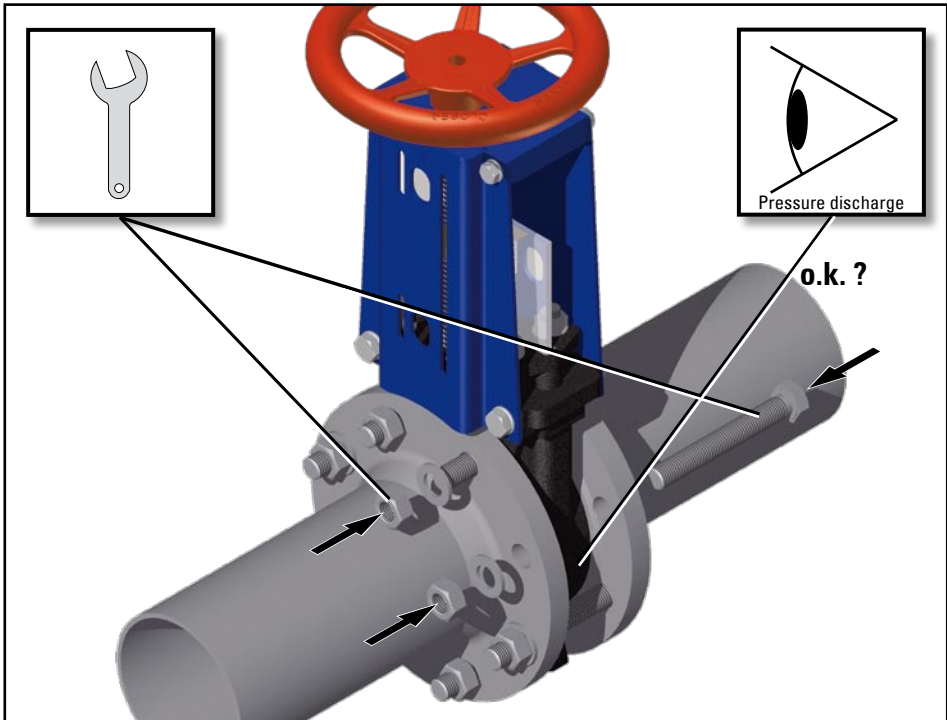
Mounting between two flanges (picture shows Art. WGE-GG-xxx-100/MW)
